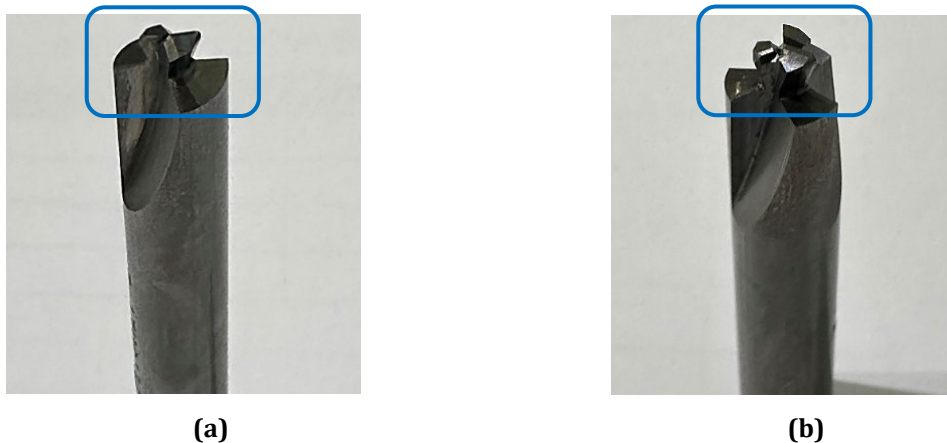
Carbide dovetail cutters (a) Two flutes cutter; (b) Three flutes cutter
